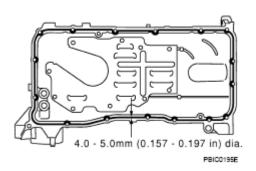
Identifying Sealant Area Of Cylinder Block Mating Surfaces And Oil Pan Courtesy of NISSAN MOTOR CO., U.S.A.
